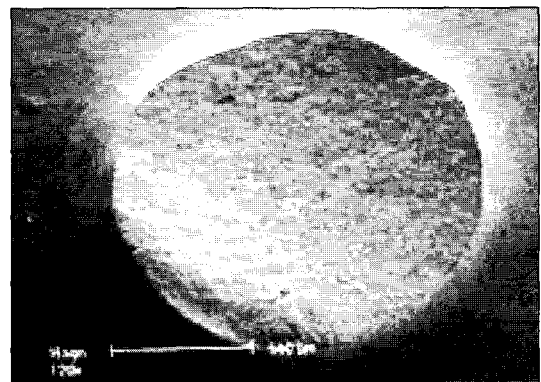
Fracture surface of a post with a core build-up fabricated using the Celay procedure and zirconia blanks($\times 120$).
